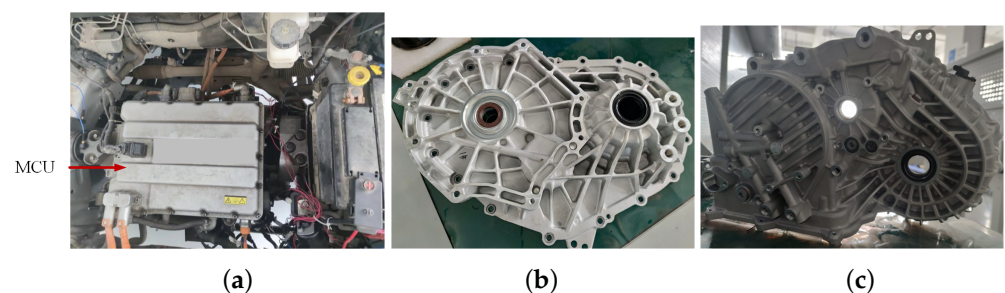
(a) Front-end view of measured vehicle. The transmission is located under the MCU. (b) Front gearbox housing after optimization. (c) Rear gearbox housing after optimization.
